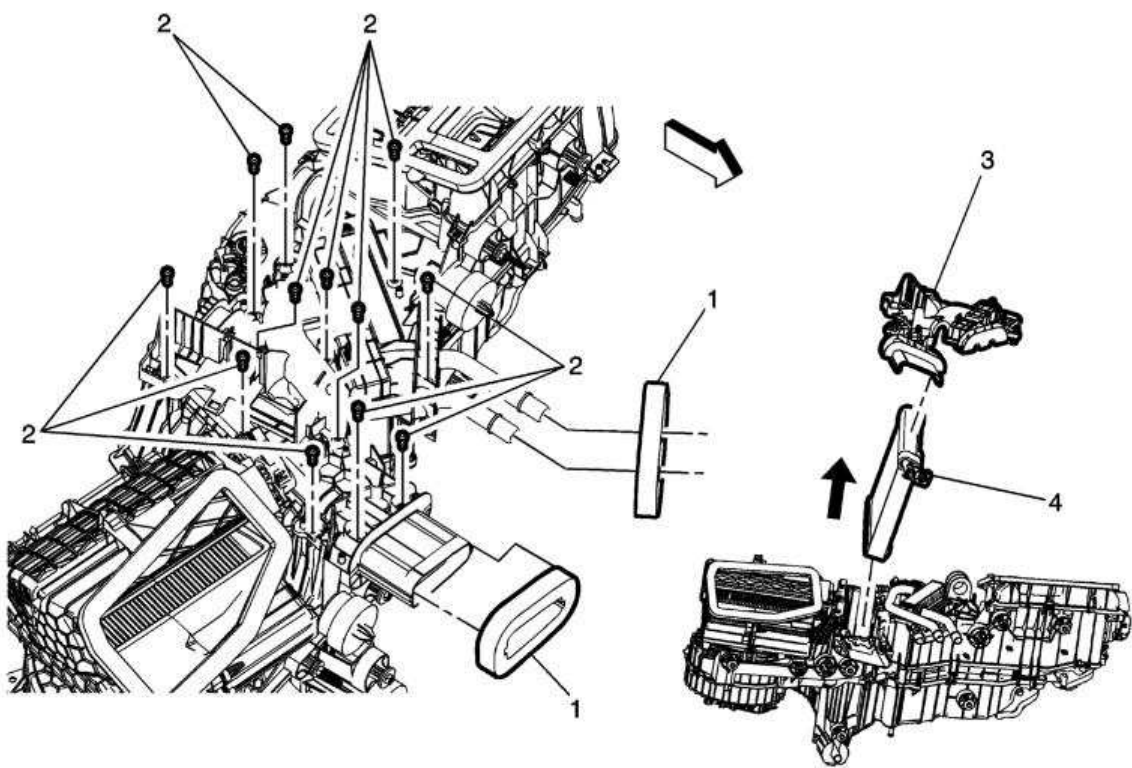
Air Conditioning Evaporator Core (R-134A Non Heat Stake)
